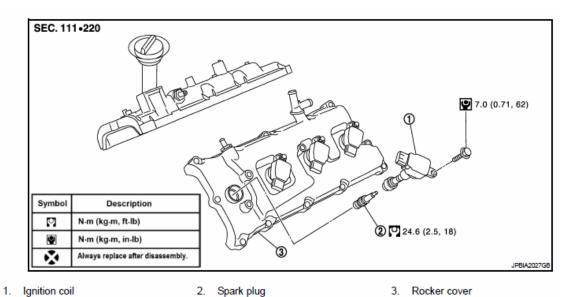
Identifying Ignition Coil, Spark Plug And Rocker Cover With Torque Specifications Courtesy of NISSAN MOTOR CO., U.S.A.
